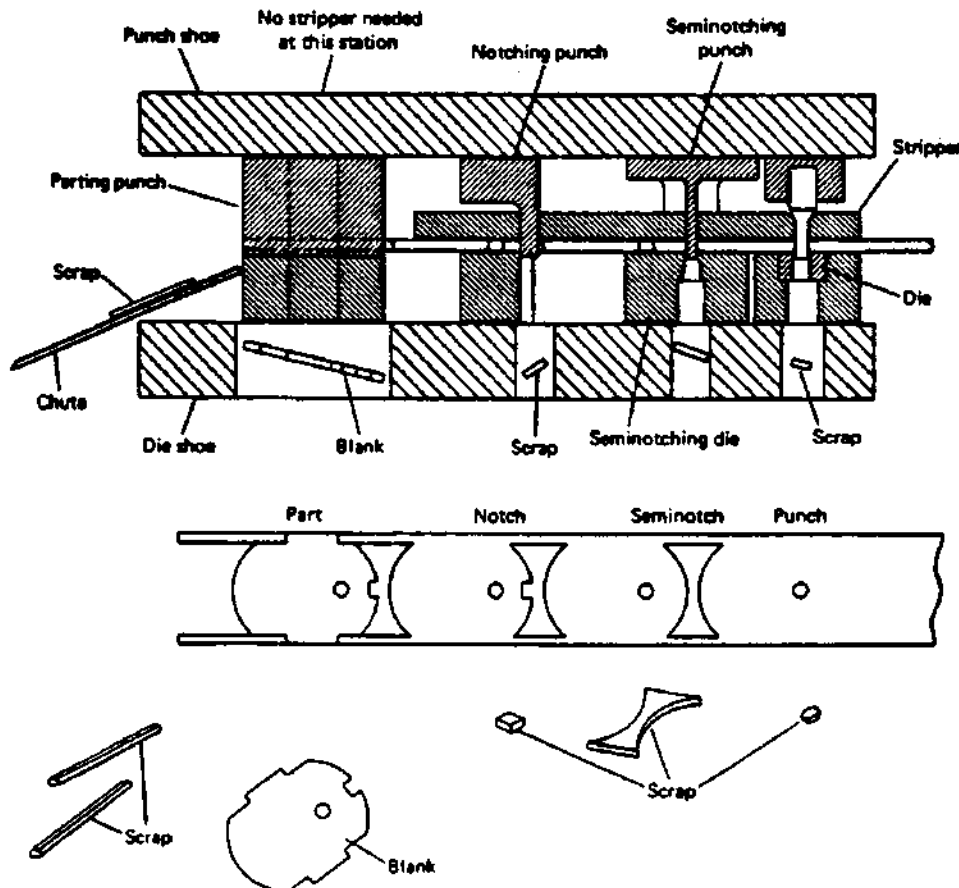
E1 A typical simple four-station progressive die that blanks and punches a part. (from Niebel, *Product Design and Process Engineering*, McGraw-Hill, NY 1974)
